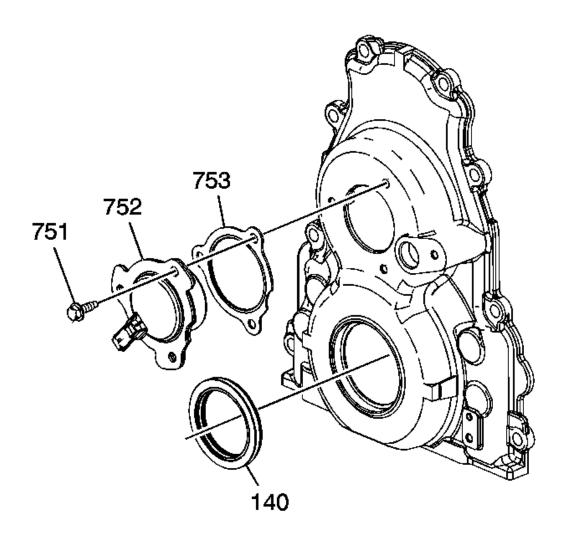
View Of CMP Actuator Magnet, Bolts, Gasket & Oil Seal Courtesy of GENERAL MOTORS CORP.
